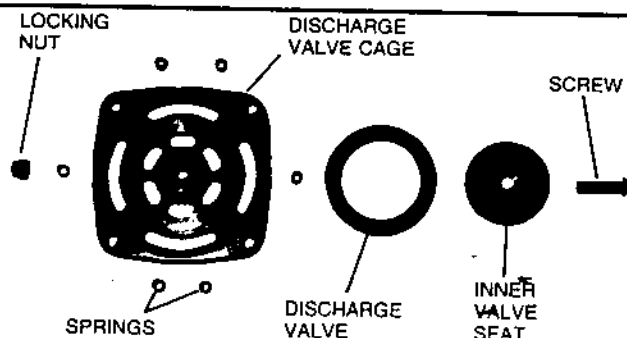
A — CURRENT DISCHARGE VALVE CAGE ASSEMBLY
